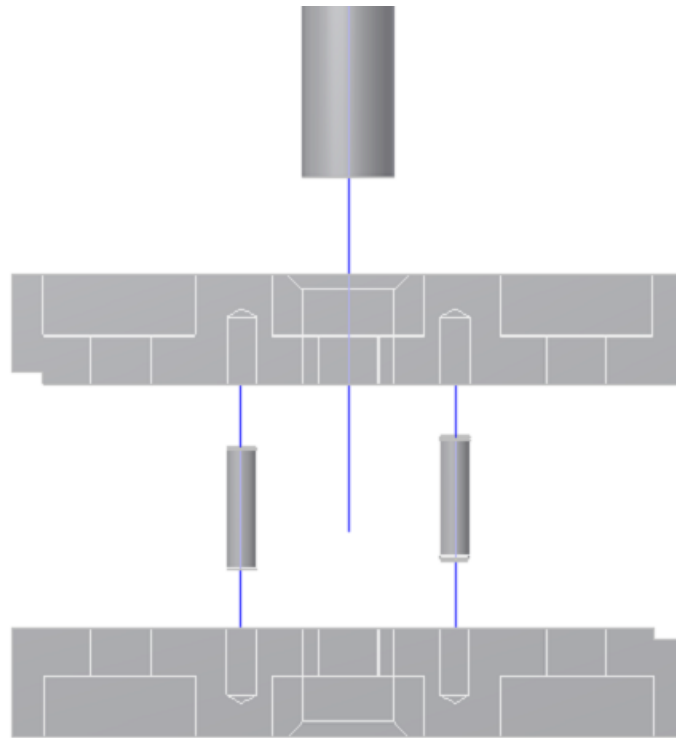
Side view of punch shear test apparatus exploded assembly.
